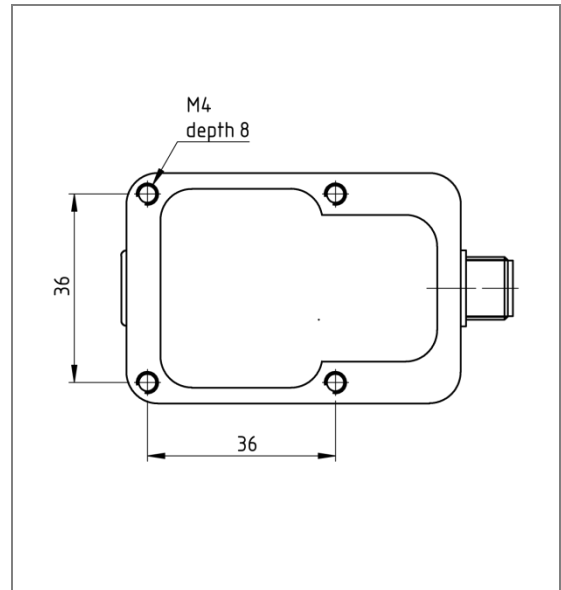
Rear side with drill holes for mounting SONOFLOW CO.55/xxxSD V2.0
